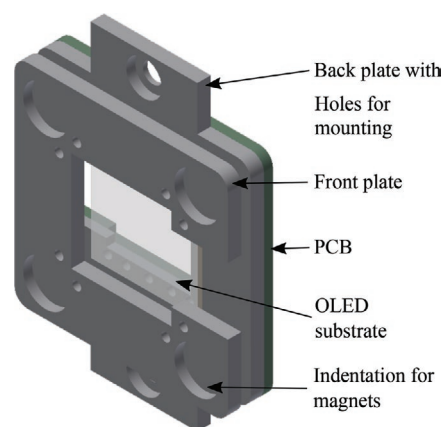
3D rendering of customized sample holder for top- and bottom-emitting OLEDs fabricated on 24 × 24 mm² substrate. The holder consists of two parts, held together with magnets. The back part of the holder contains a printed circuit board (PCB) with contact pins and cable connector to make electrical contact to the OLED pixels.
